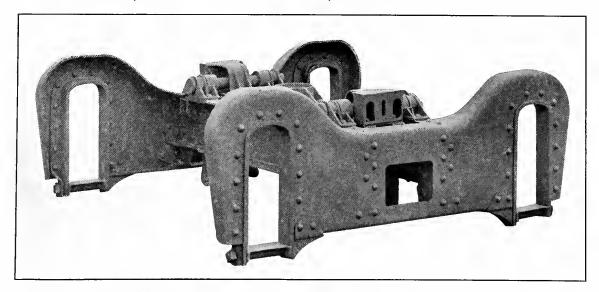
Fox Swing Motion Bolster Truck with Wheels and Fittings Removed. Pressed Steel Car Company.
